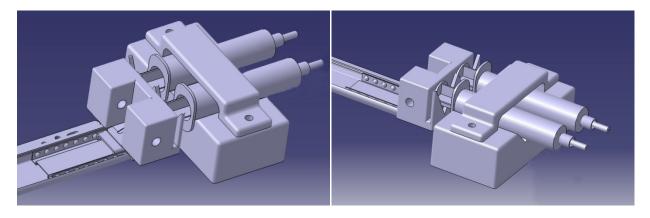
Assembled mechanical subsystem, minus the linear actuator.
